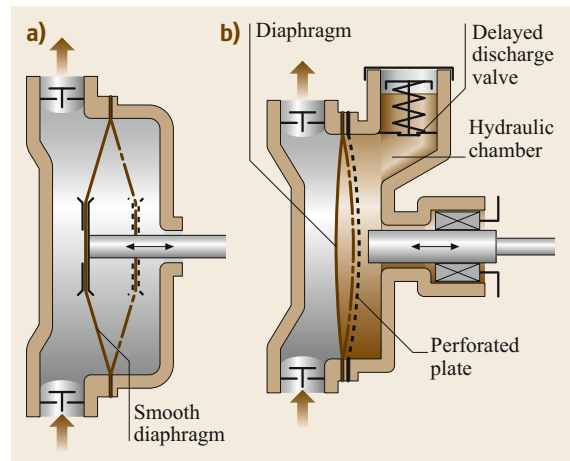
,b Diaphragm designs. (a) Mechanical drive, (b) hydraulic drive
